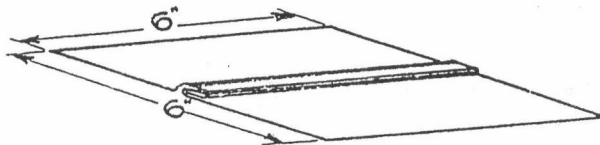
PERSPECTIVE VIEW OF GROOVED LOCK SEAM
